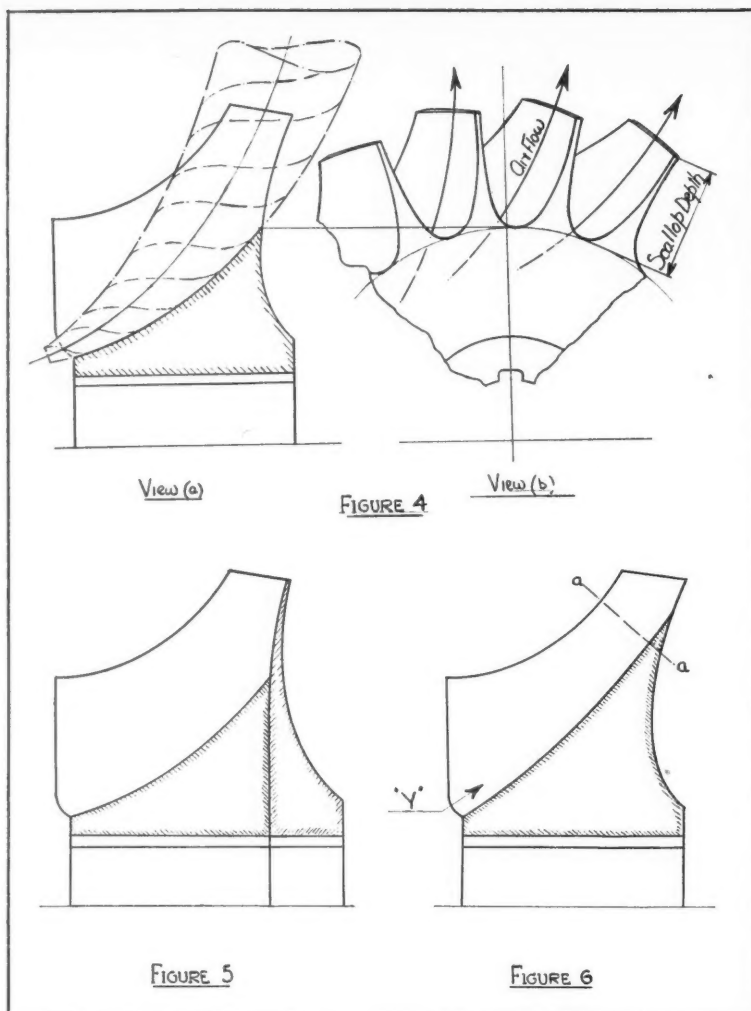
View (a) Positions assumed by the cutter during the machining of a vane profile. View (b) Scallops formed at the back face of the impeller by the large diameter of the cutter
